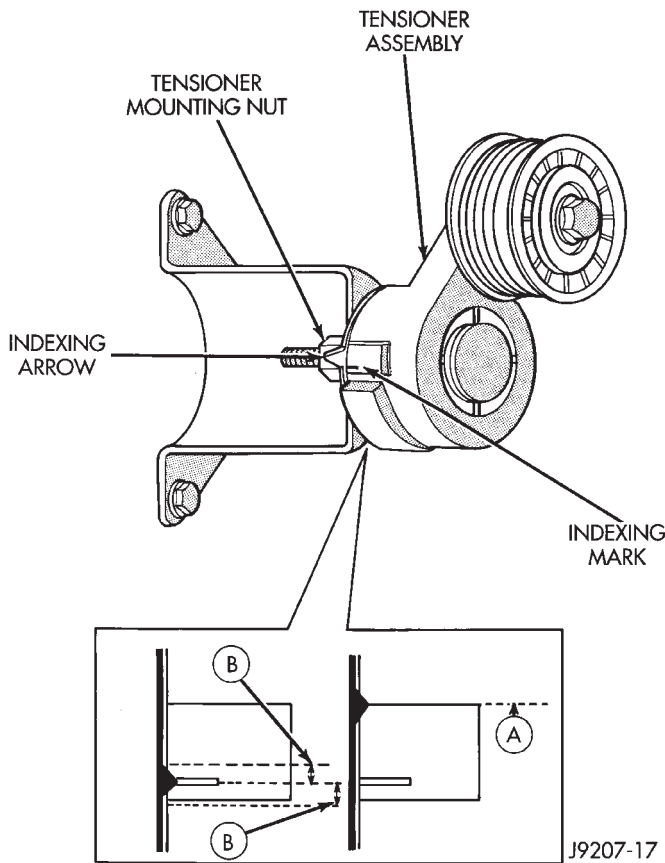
Belt Tensioner/Pulley Assembly—5.2L Engine
